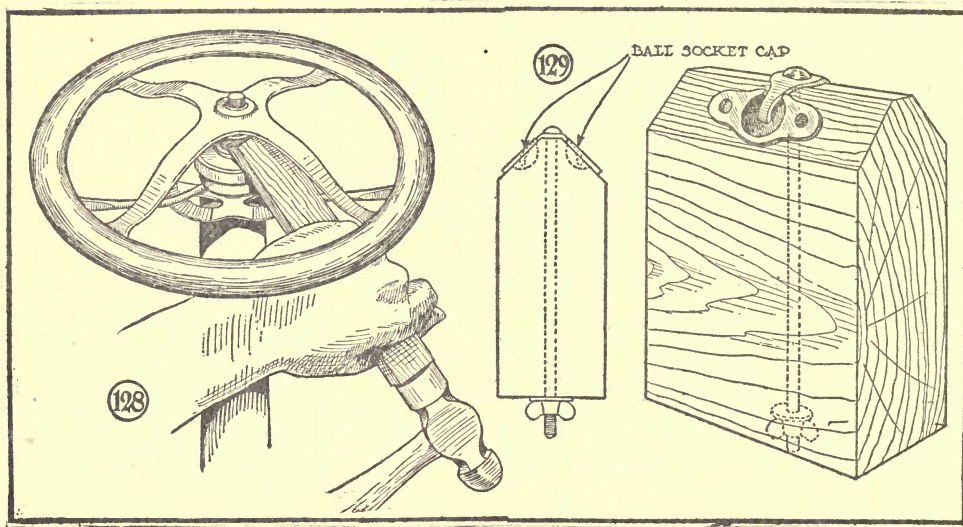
The steering wheel is removed by taking off the nut and driving the spider off with a block of wood and a hammer
